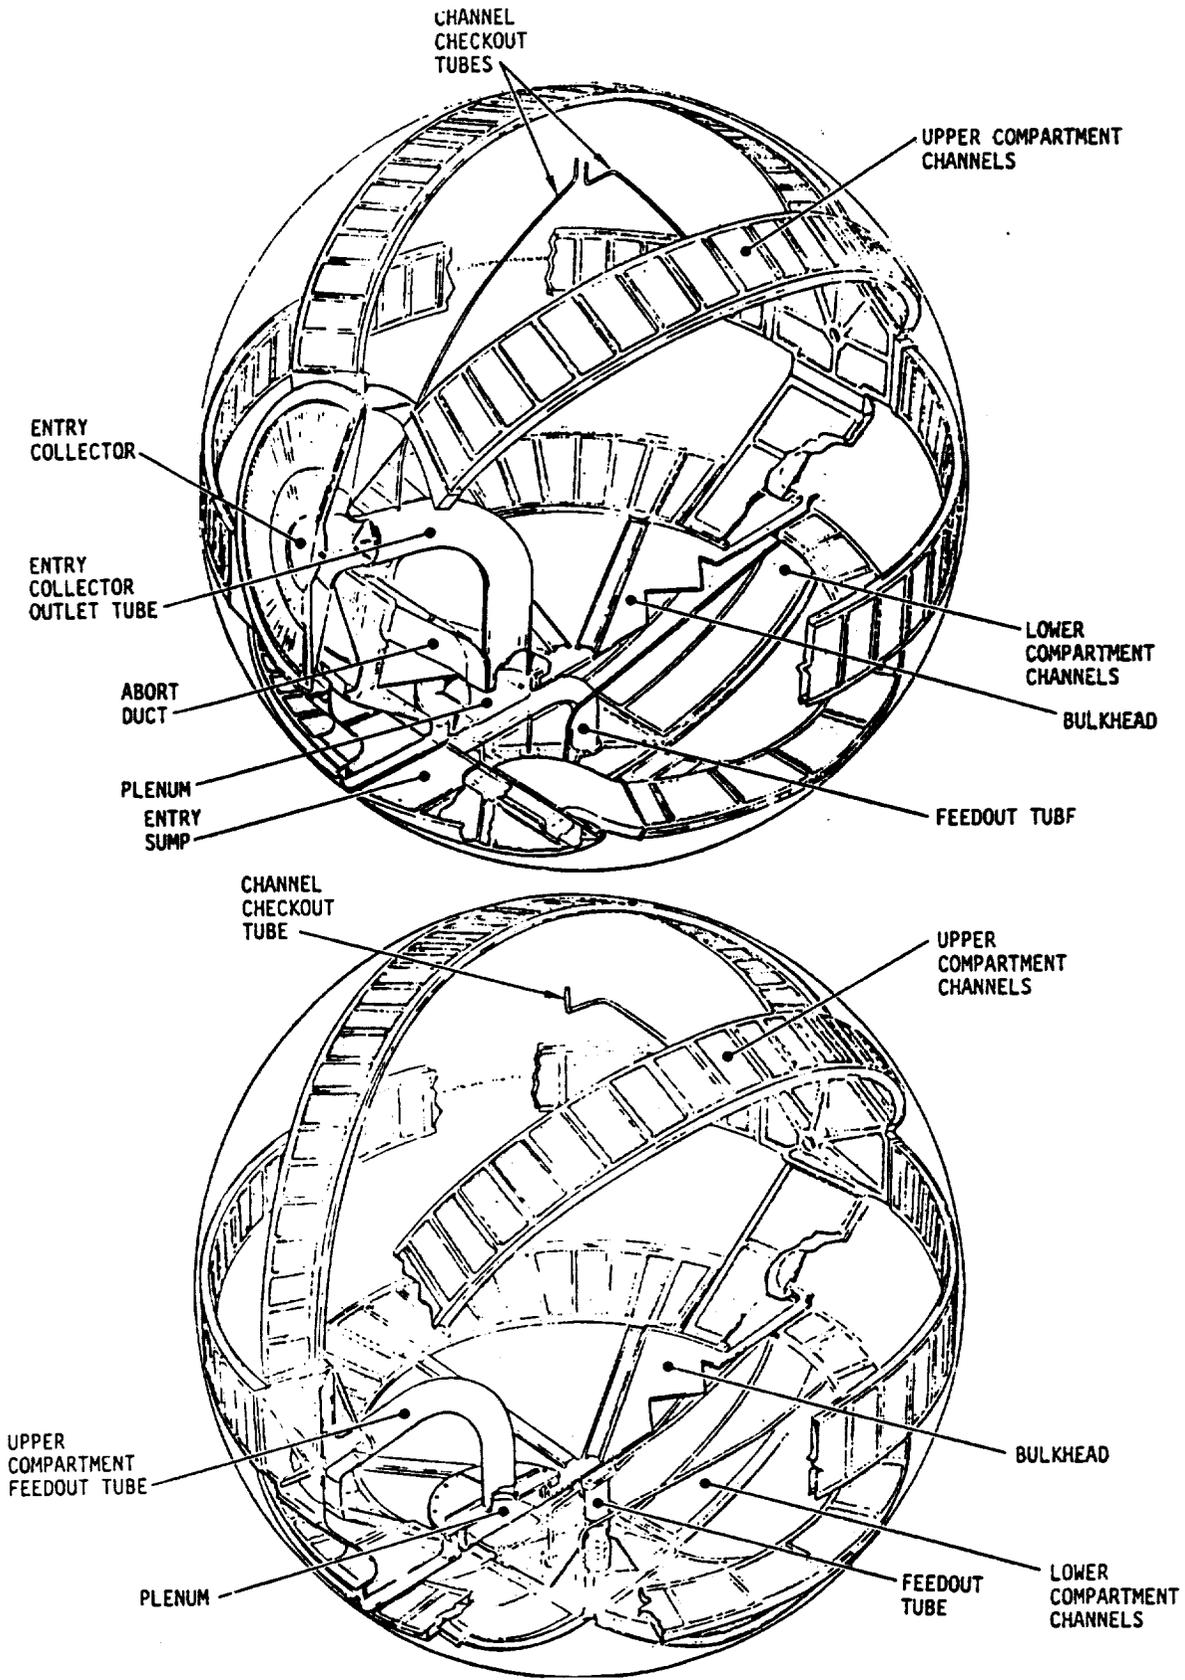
AFT AND FORWARD RCS PROPELLANT TANKS
